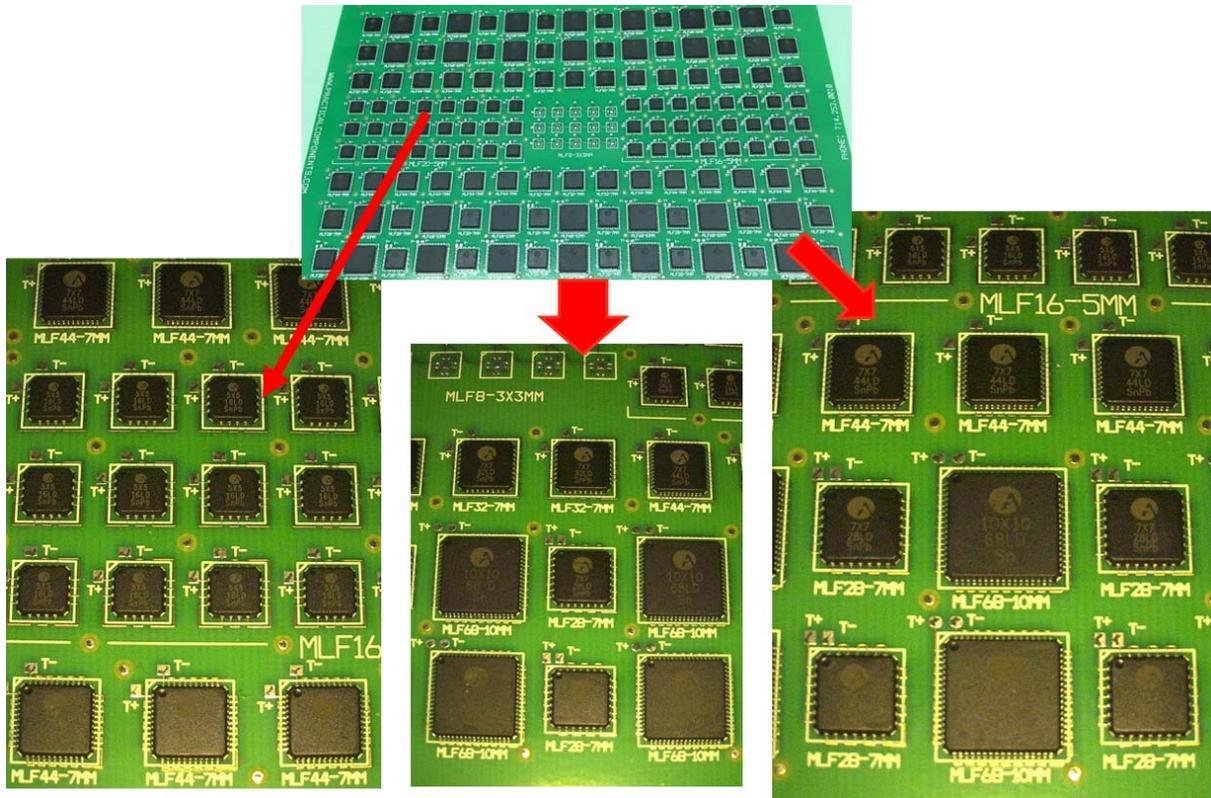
QFN daisy-chain assembled onto ENIG PCB finish with 0.062 inch PCB thickness. Assembled by a supplier.
